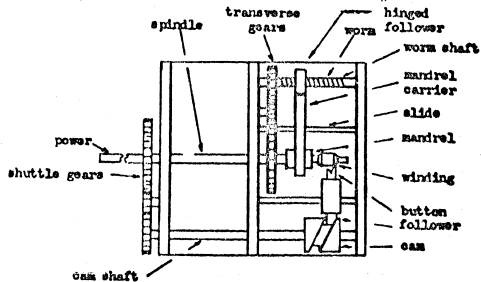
Universal Winding Machine converted to Progressive-universal.
